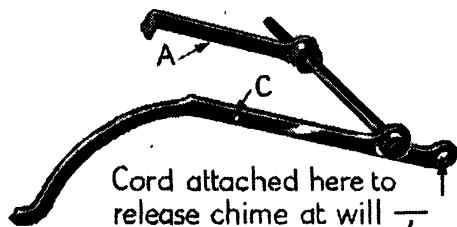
This lever releases the chime mechanism in a similar fashion to the strike mechanism.
